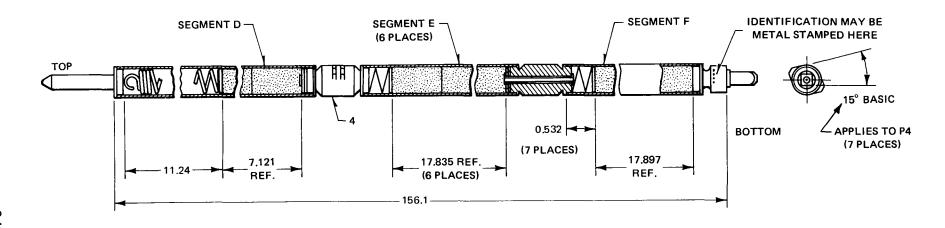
Fuel Assembly Drawing for 2.62% Enriched 8 x 8 Reload Fuel
